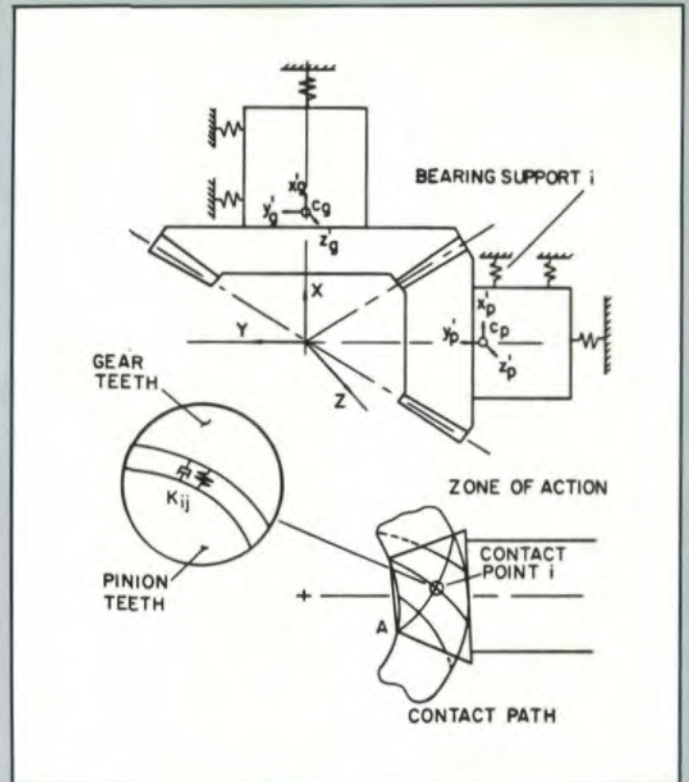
Geometry and mathematical model of spiral-bevel gears.
